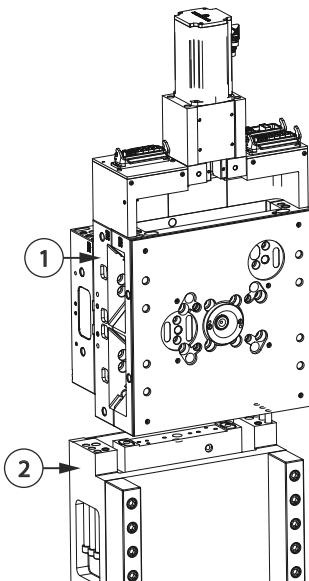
Removing the Bottom Mounted Actuation Assembly
